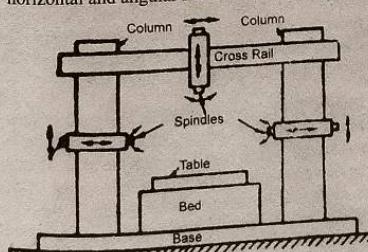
Block Diagram of Multiple Head Type Boring Machine
